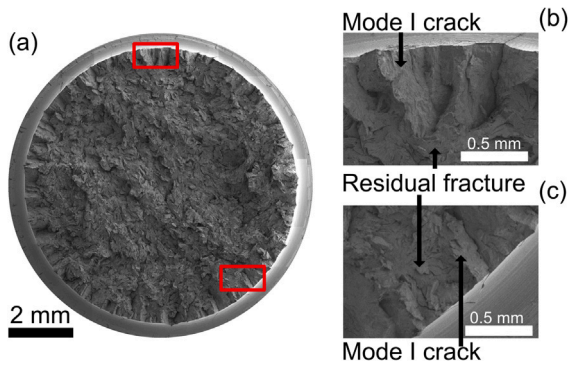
Representative fracture surface of undeformed test bars cyclically shear loaded with and without a static compressive load. (a) overview, (b) and (c) detailed view.
